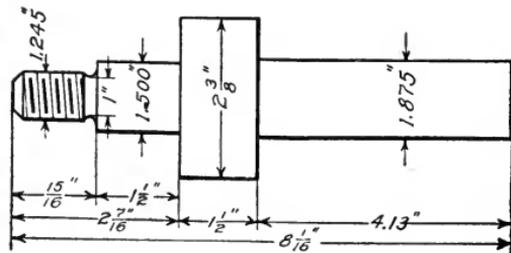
Diagram Showing Piece Produced by Turret Lathe, Fig. 355b
